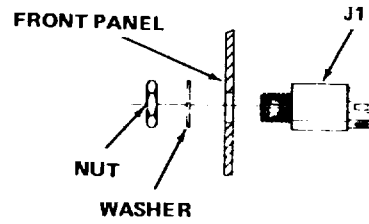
Control-Indicator Front Panel and Chassis-Mounted Parts Location Diagram (Sheet 2 of 3)
